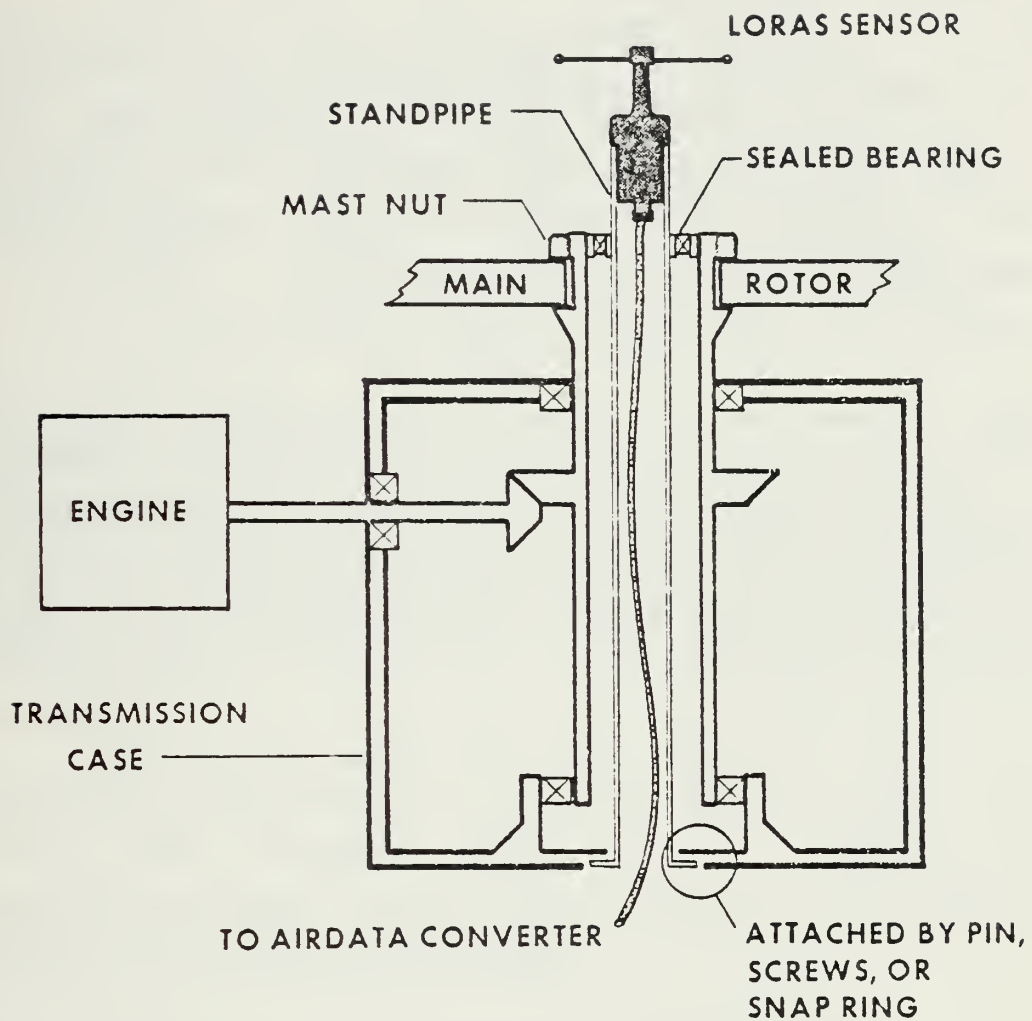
TYPICAL STANDPIPE INSTALLATION
